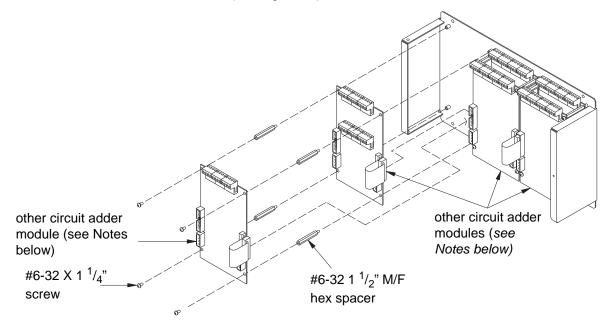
BB-1072 Expansion Chassis Mounting Locations
